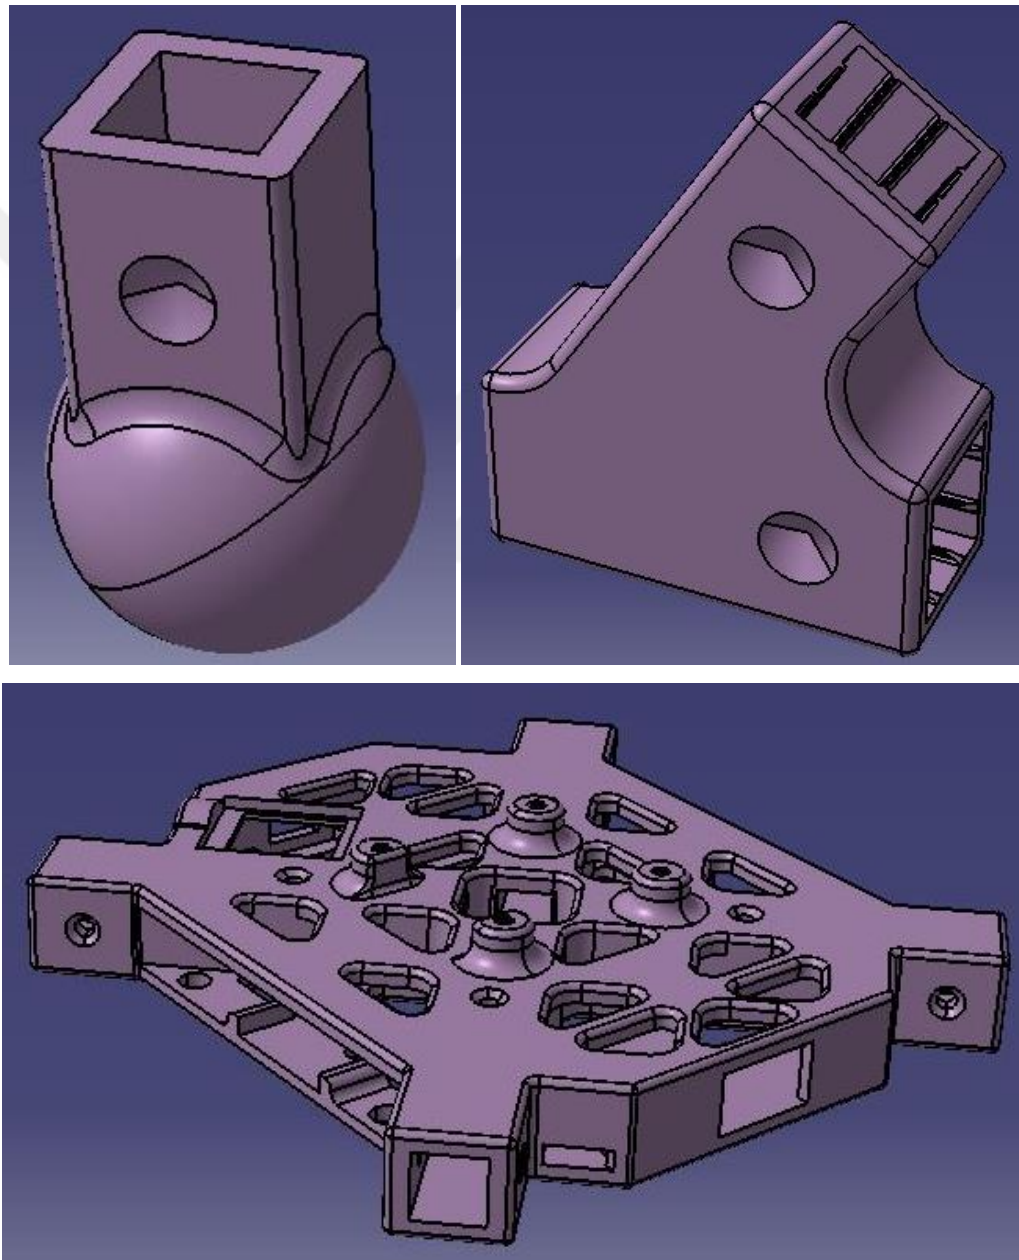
3D printer drawings of some plastic parts of the UAV
